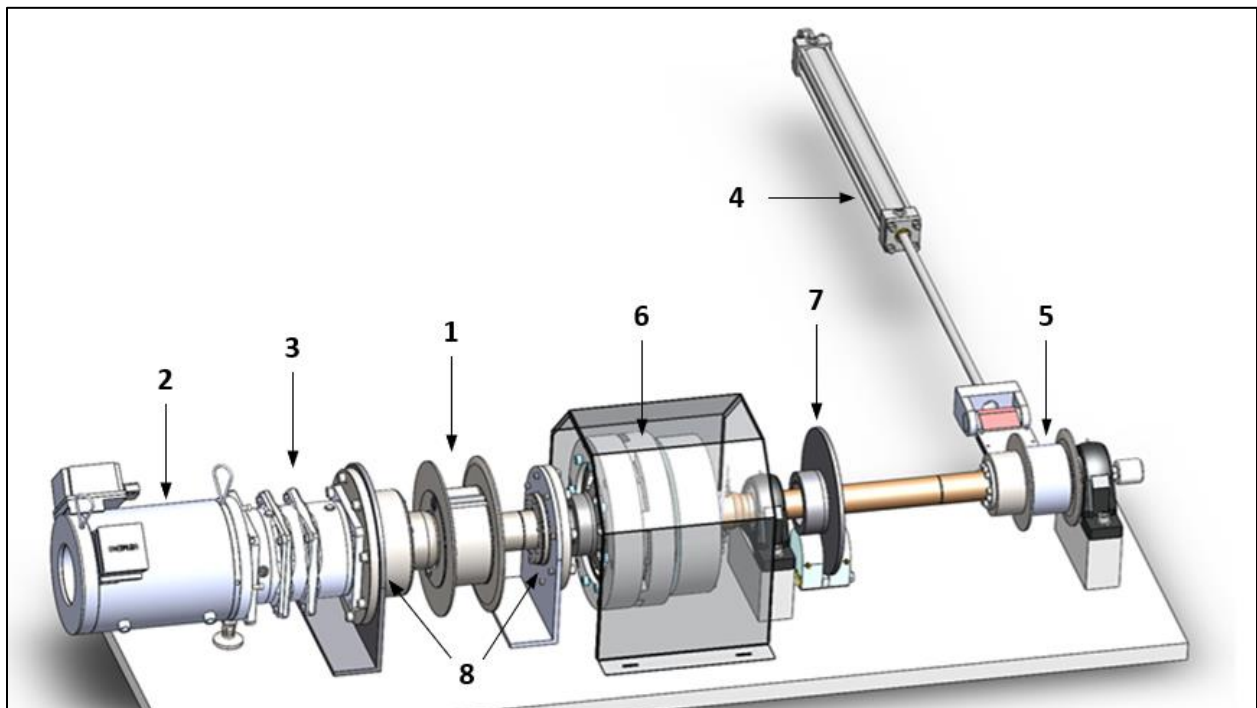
Rendering of PTO. Components from left to right include motor, gearbox, mooring drum, clutch, pillow block bearings, brake, spring drum, and hydraulic cylinder gas spring.
